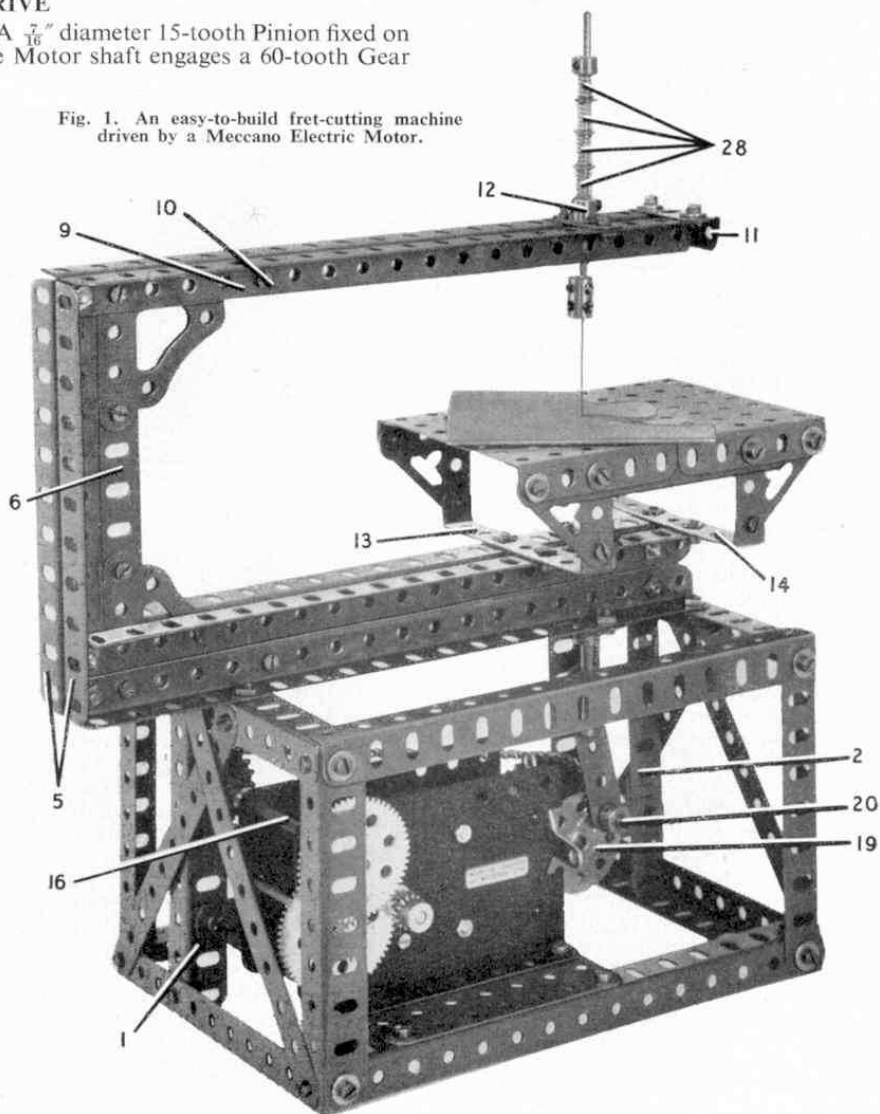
An easy-to-build fret-cutting machine driven by a Meccano Electric Motor.
